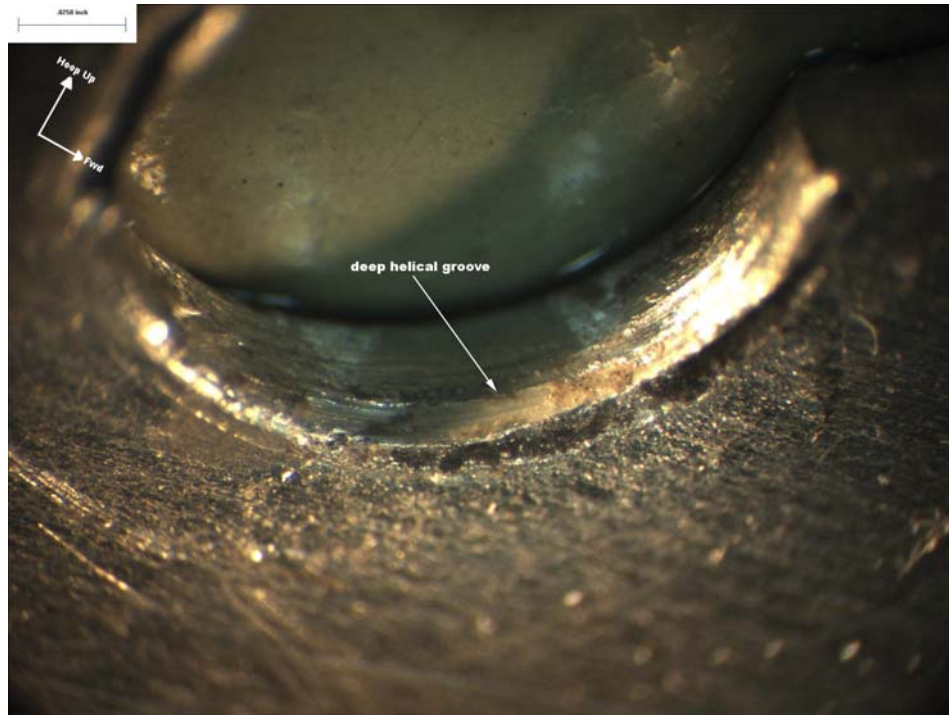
Example of the rivet hole defects in the right hand side panel panels
